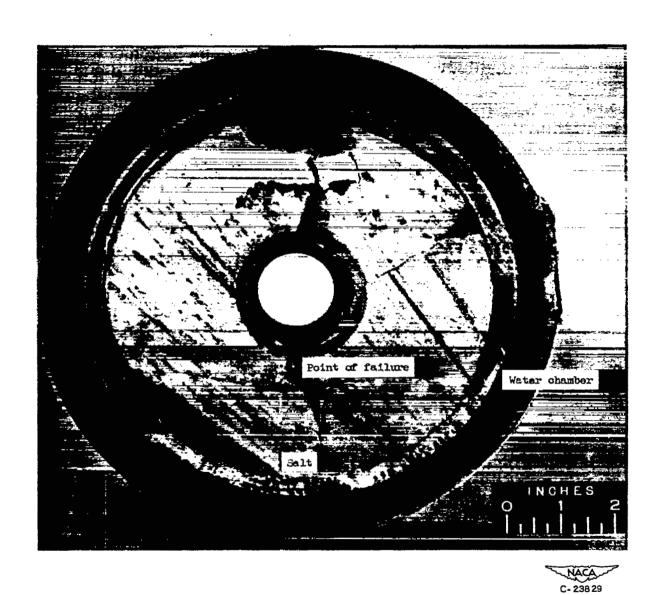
Sectional view of wire combustion chamber after failure.
